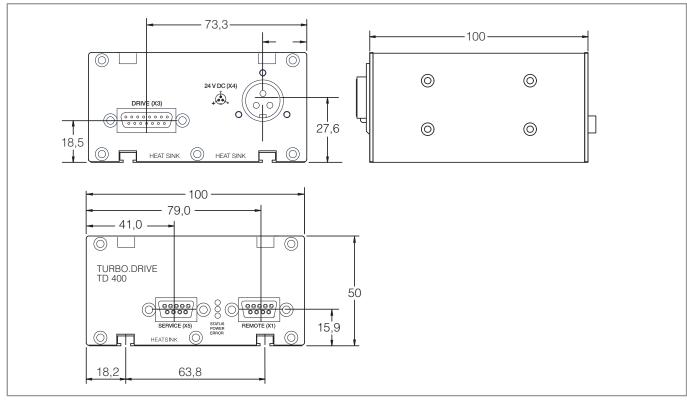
Dimensional drawing for the frequency converter; dimensions in mm
